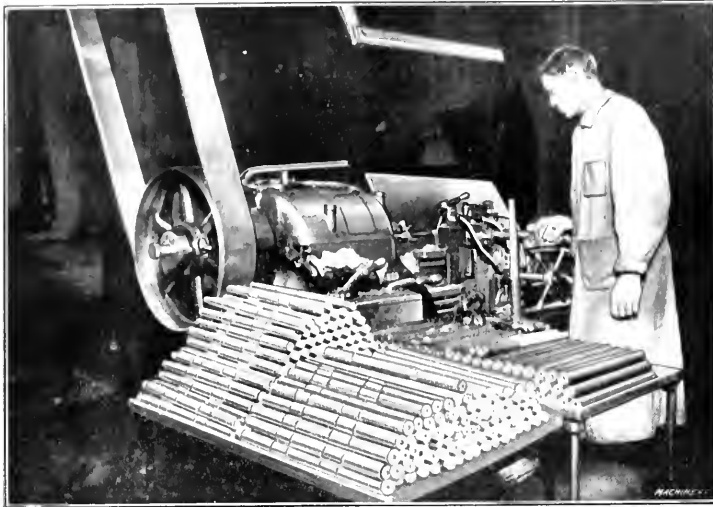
Rough-turning Armature Shafts in a "Lo-swing" Lathe
